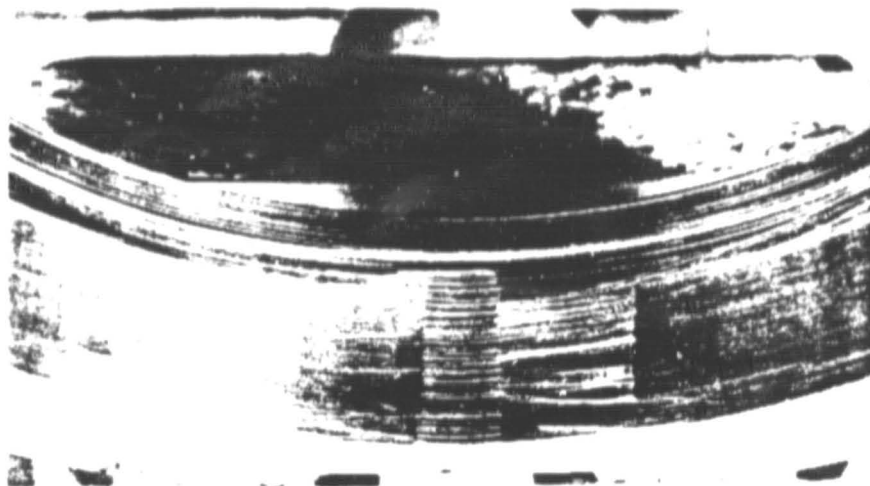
Damaged Seal; Outboard Ring - Seal Set No. 3
